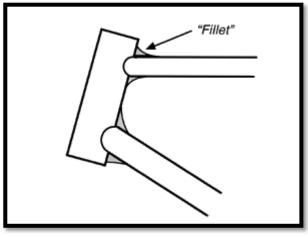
Cross section of a fillet-brazed bicycle head tube.
